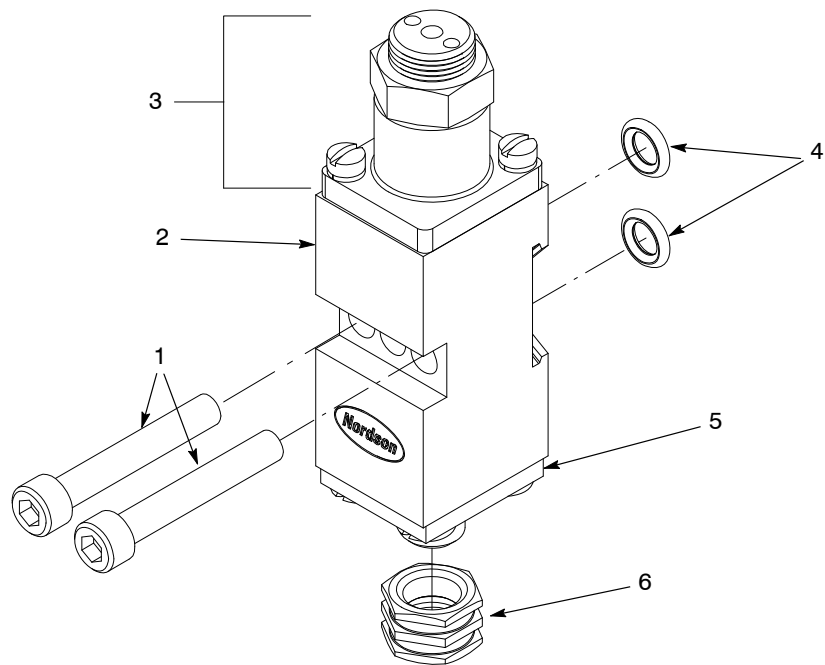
Key parts of a typical bead module (standard ClassicBlue module shown)
